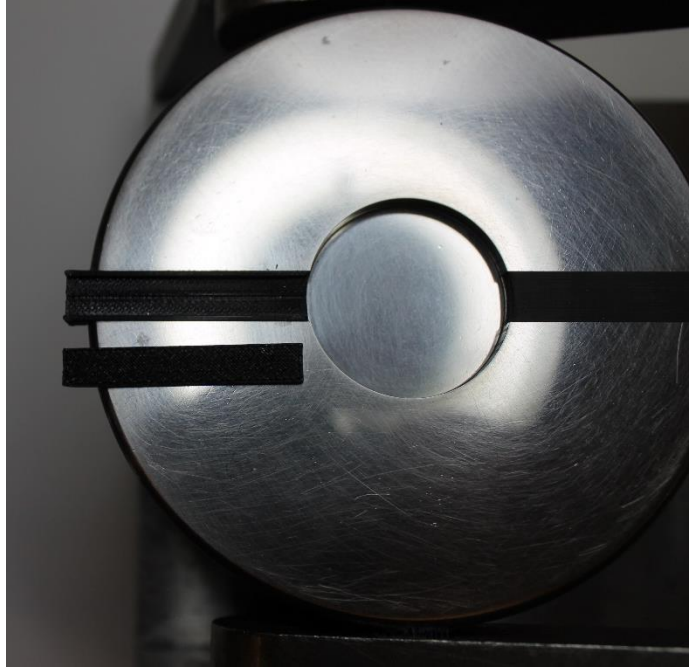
Pellet press die machined to accommodate 3d printed inserts (installed)
